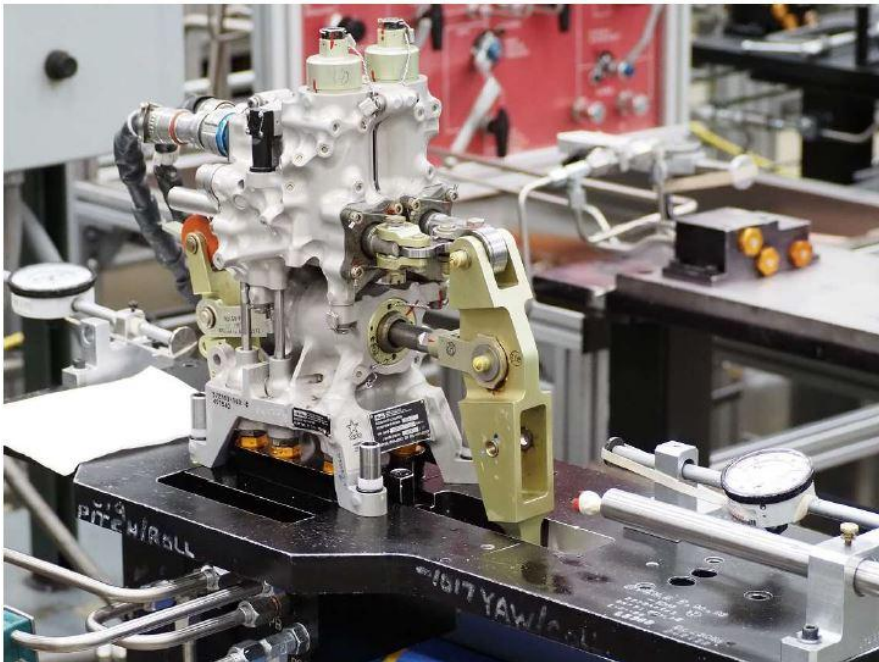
The pitch boost/SAS servo installed on the hydraulic test bench at Parker Aerospace.
